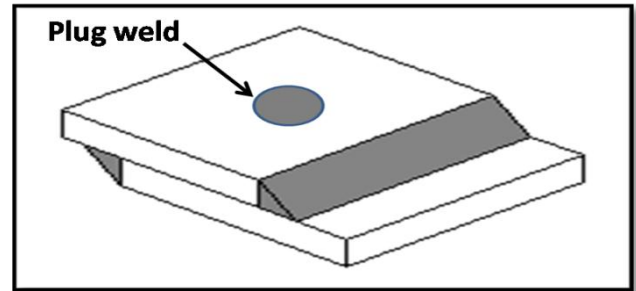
A plug weld / double fillet welds mixed joint
